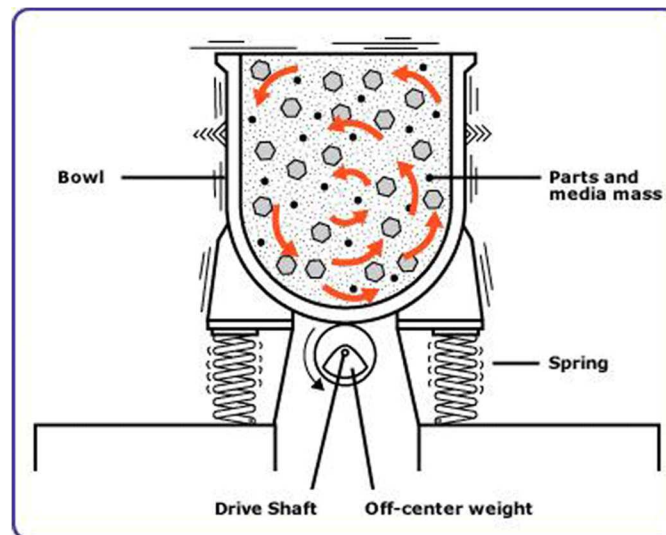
Movement of the pieces inside the vibratory machine. Source: www.vacaero.com
